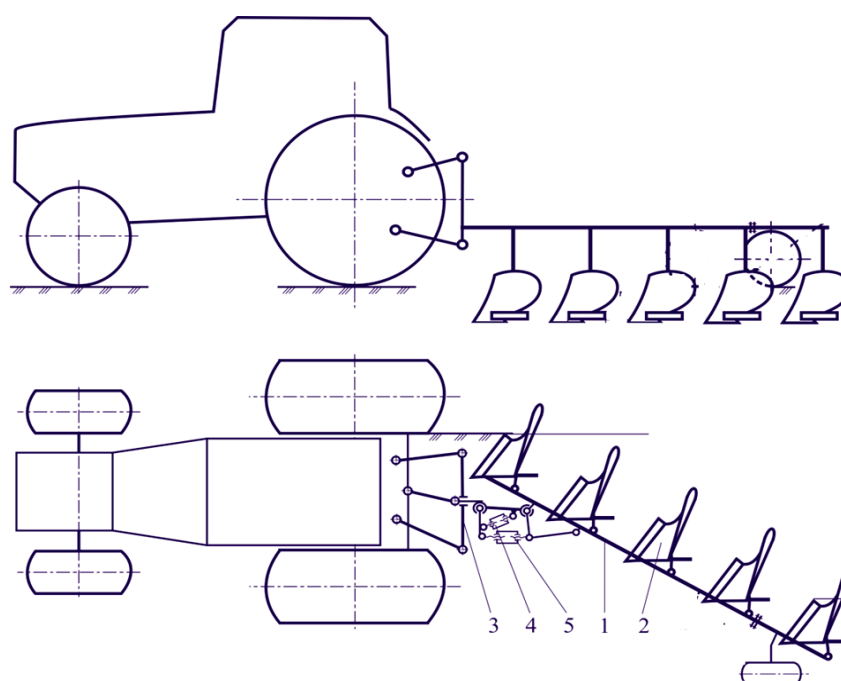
Construction scheme of the modular plug to be aggregated with high-power tractors
